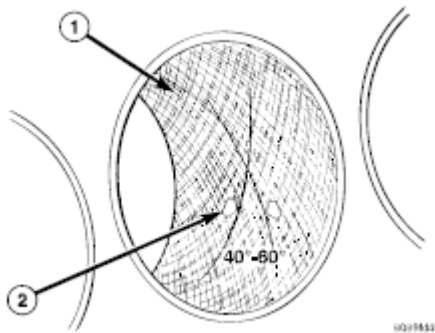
Identifying Crosshatch Angle In Cylinder Bore
